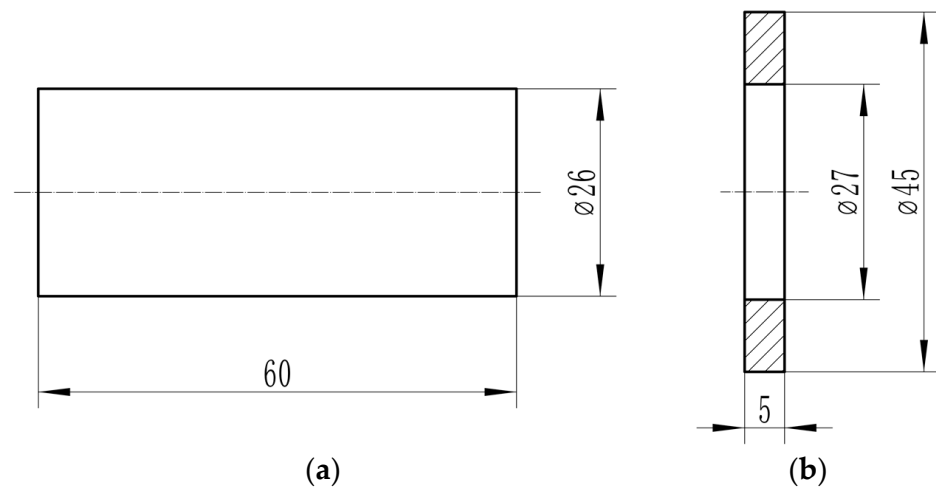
Aluminum/steel weldment structure and size: (a) 30CrMnSiA steel rod. (b) 6061-T6 aluminum alloy ring.
